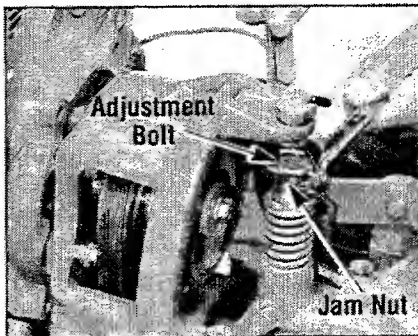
Loosen jam nut before turning reverse adjustment bolt.
